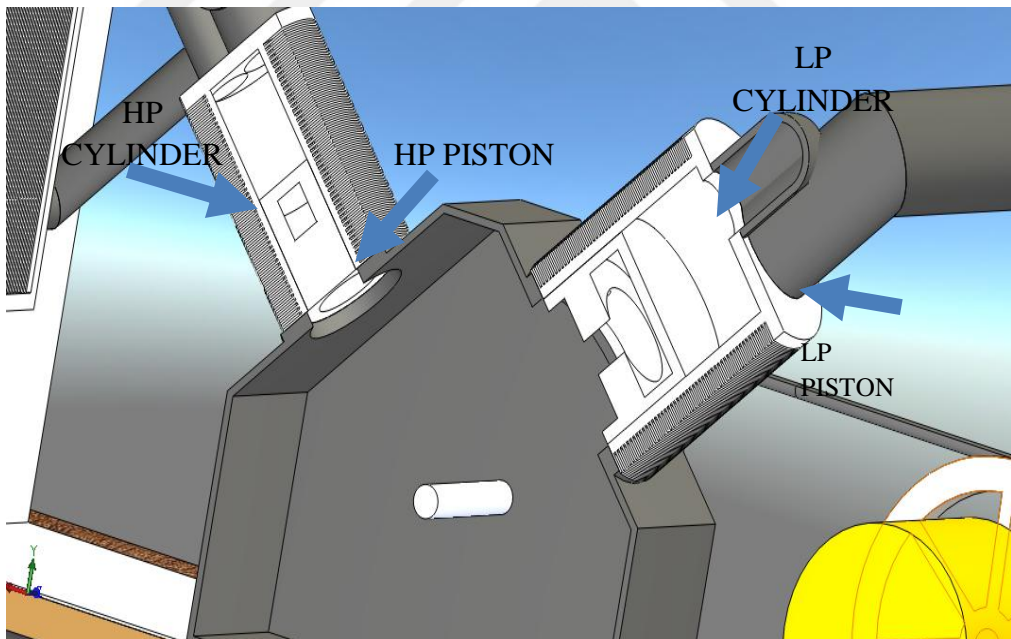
Cross-Sectional view of cylinder and crank case.
